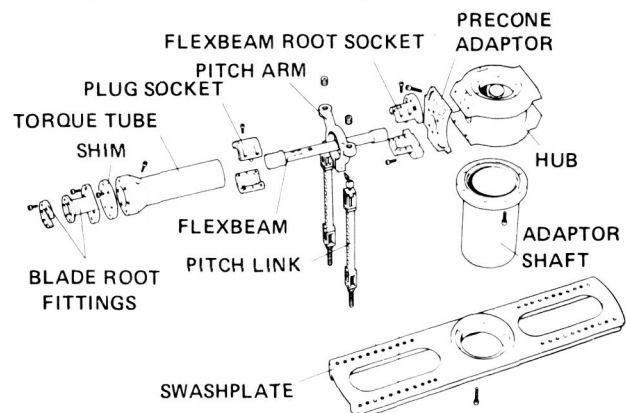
Exploded view of bearingless model rotor flexbeam and hub.
